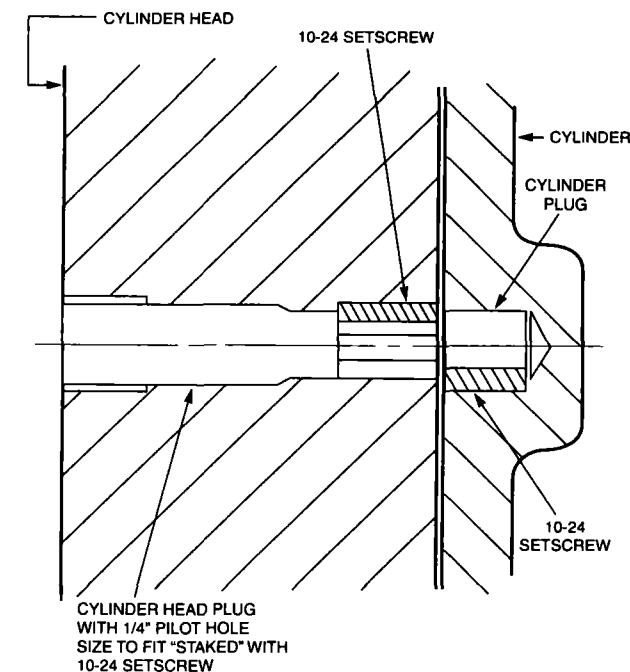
Cylinder head plug with 1/4 inch pilot hole size to fit "staked" with 10-24 setscrew.
